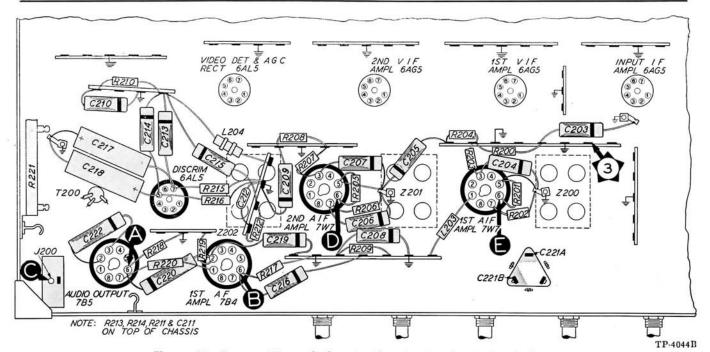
Bottom View of Chassis, Showing Section 2 Test Points
